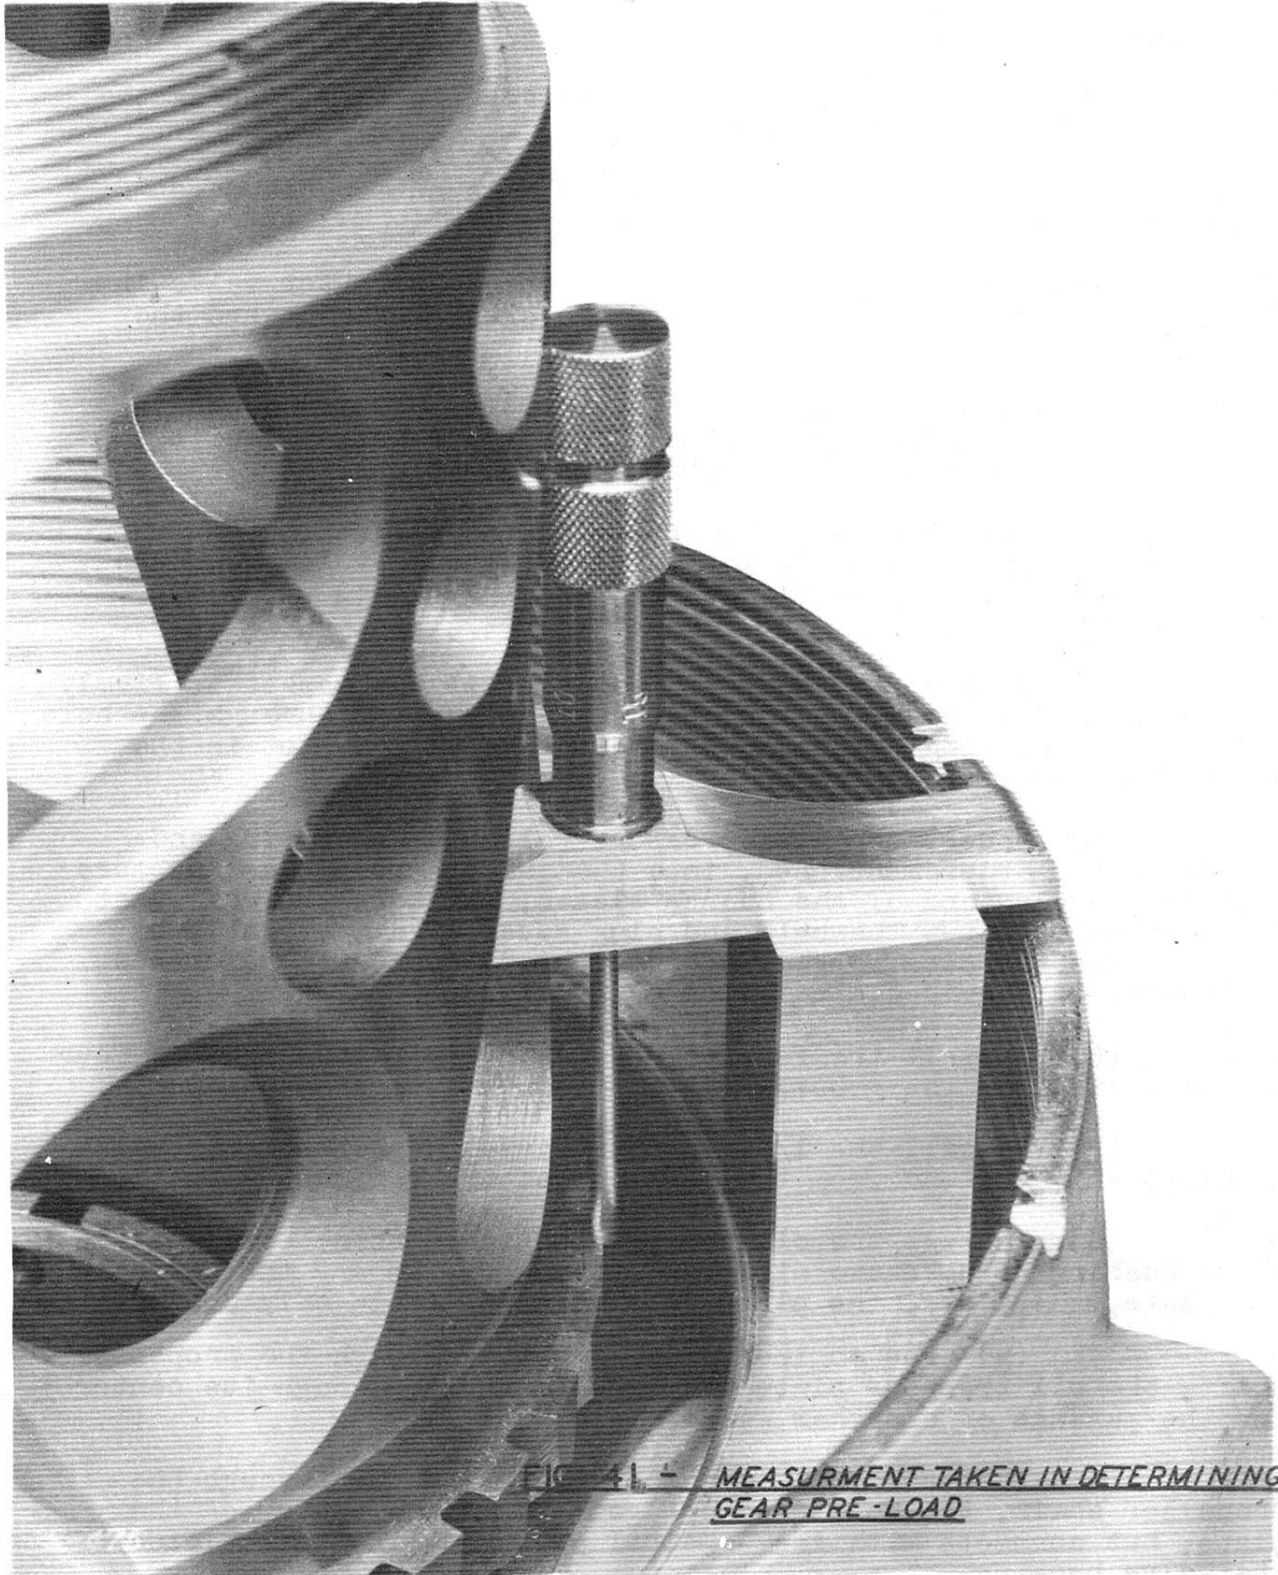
MEASUREMENT TAKEN IN DETERMINING GEAR PRE-LOAD
